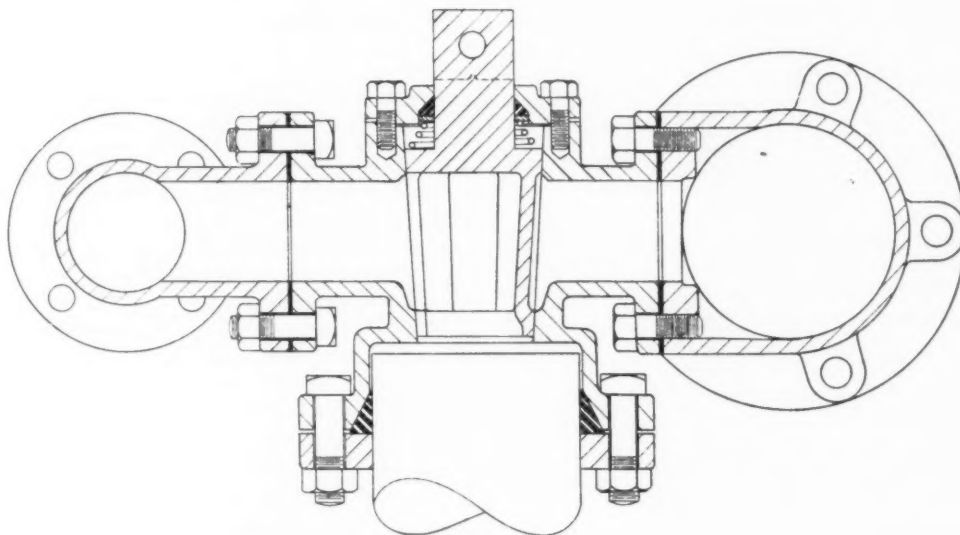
SPECIAL THREE-WAY PLUG VALVE WITH 2-IN. AND 4-IN. CONNECTIONS
